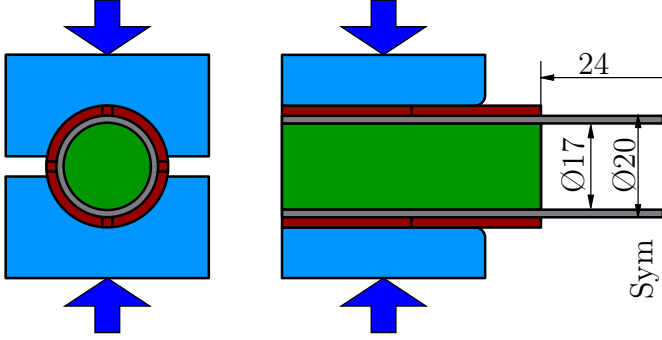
Tube specimen (gray) with inner plugs (green), outer sleeves (red), and machine grips (light blue). The grip force exerted by the machine is shown by blue arrows. All dimensions in mm.
